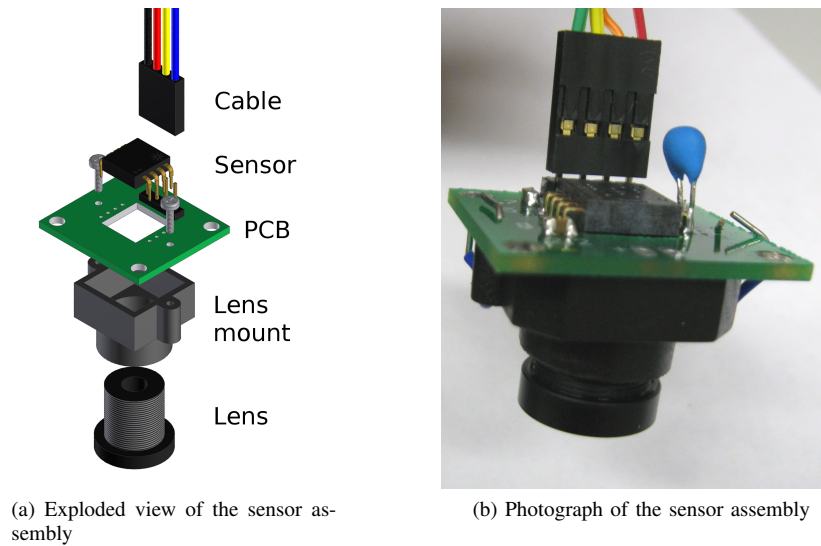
Rendering and photograph of the sensor assembly. 3-D models of mouse chip and lens mount courtesy of Avago Technologies and Marshall Electronics respectively.
